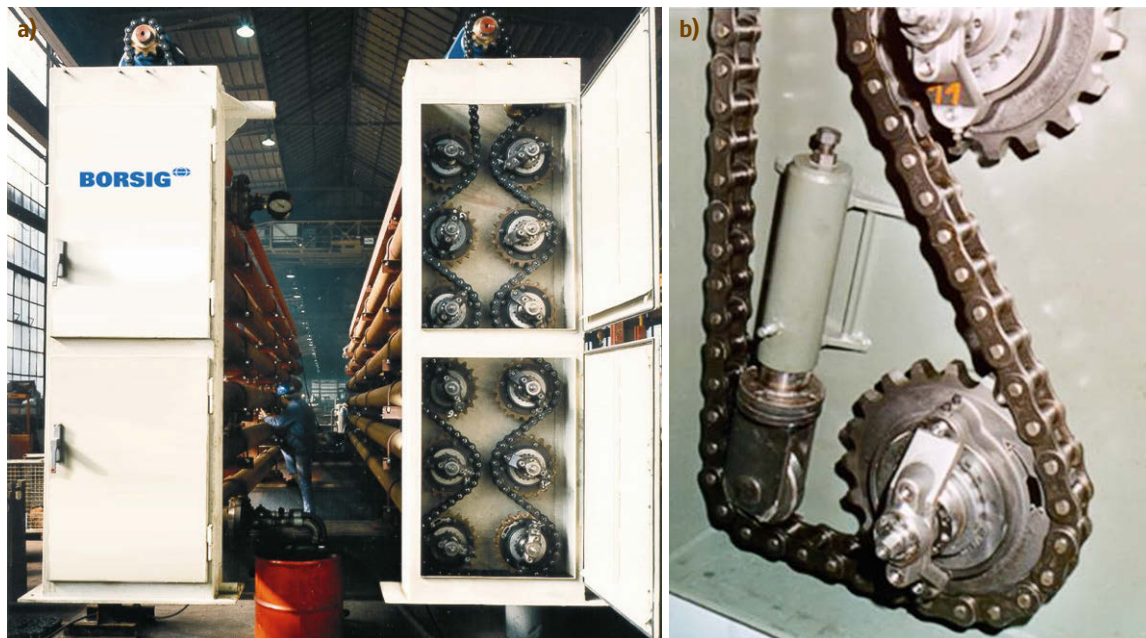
,b Drive system and chain tightener of an SSE. End view of chain drive (a), close up view of chain tightener assembly (b) (Photos courtesy of BORSIG)
